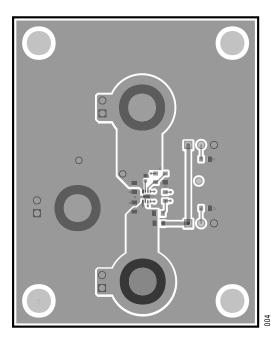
ADPL40505A EV kit PCB Layout— Top Layer (Top View)
